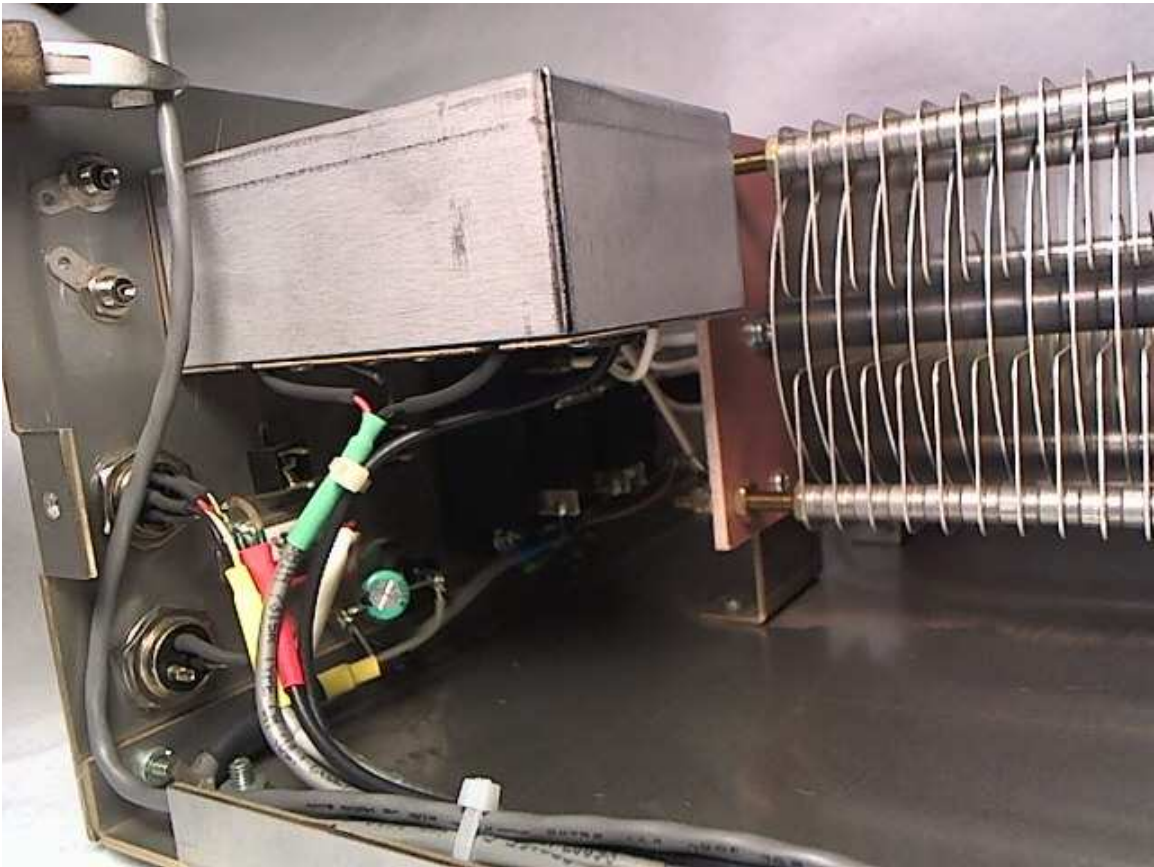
AT-AUTO_(tm) Excess Wiring Harness Removal
